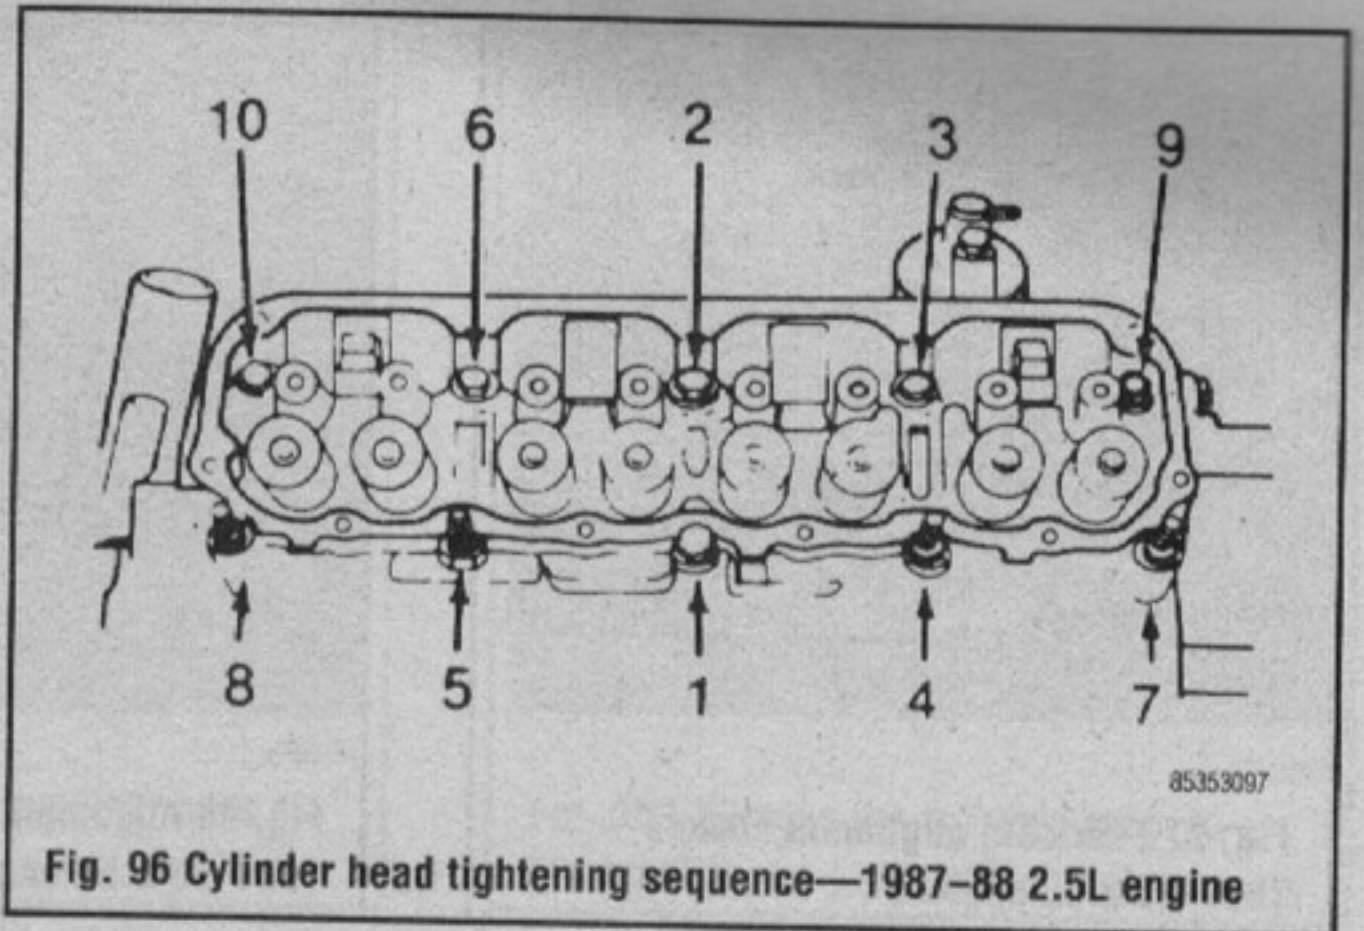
Cylinder head tightening sequence—1987-88 2.5L engine
